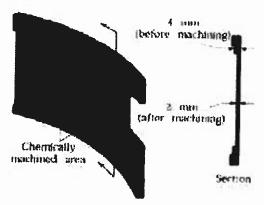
Missile skin-panel section contoured by chemical milling to improve the stiffness- to- weight ratio of the part (Kalpakjain & Schmid)
